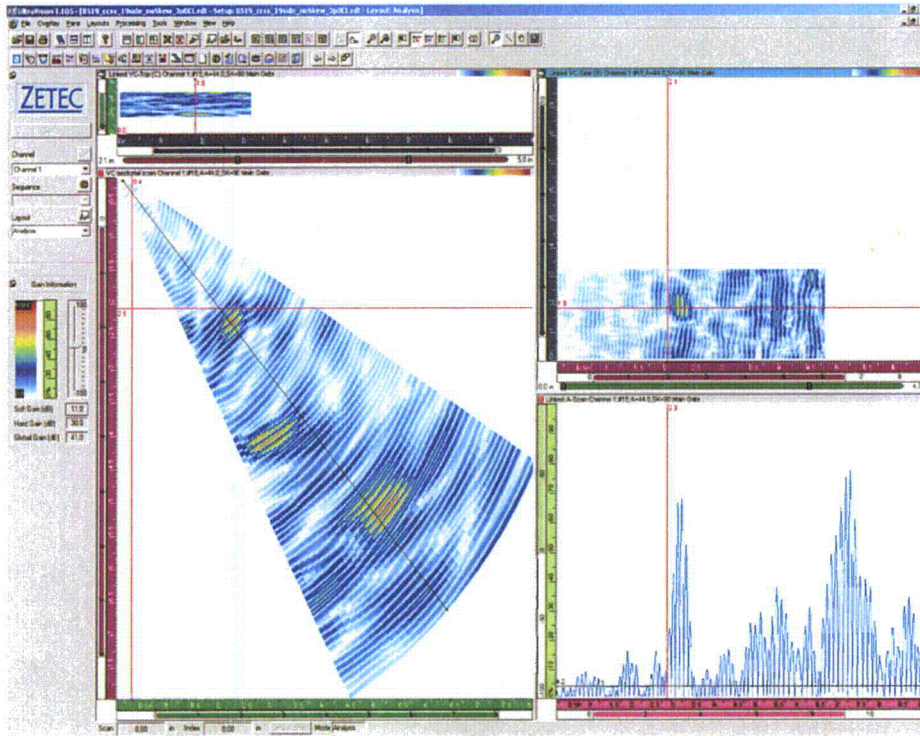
B519 Inspected from the Equiaxed Side of the Weld, Showing a Yes Detected
